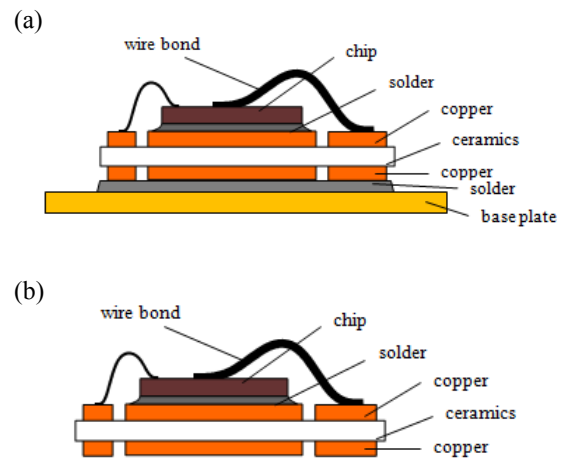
(a) Internal structure of a DCB based module with a base plate and (b) without base plate
